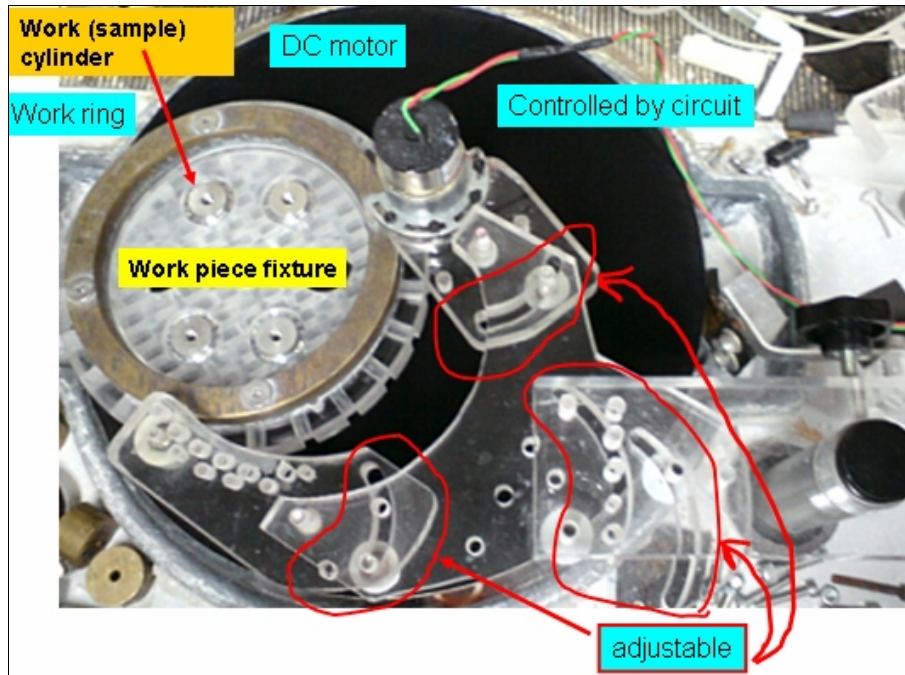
Top view of the whole system which contains flexible swing jig holder, DC motor, large workpiece fixture..
